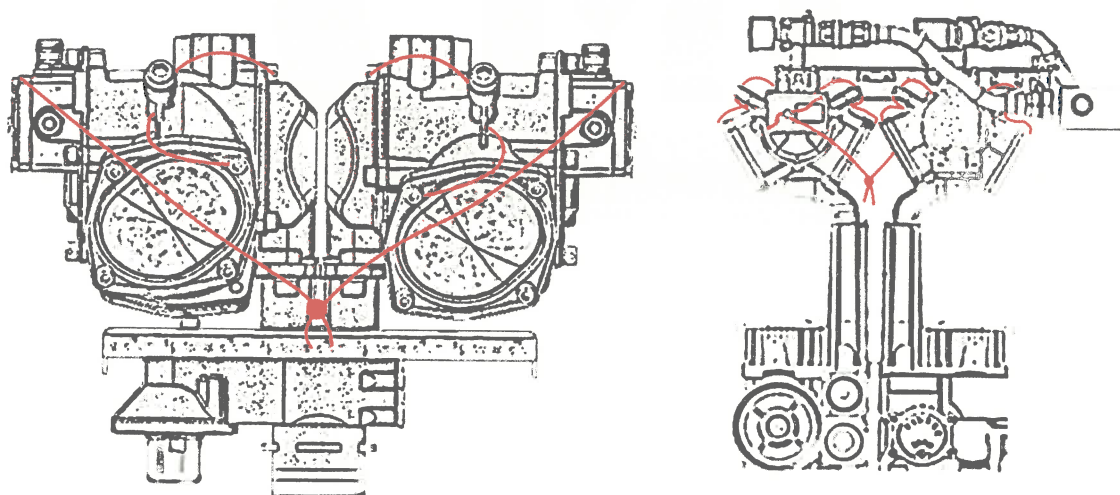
The sealing of the measurement transducer Q-Meter type 2 with Smart pulser 1
